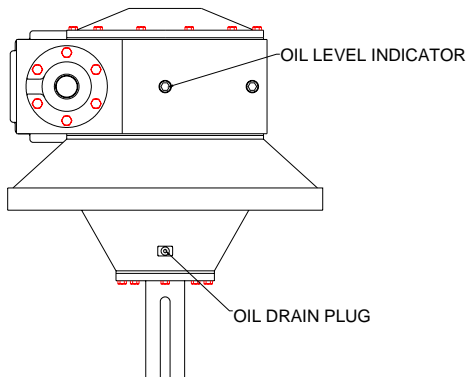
OIL DRAIN AND FILL INDICATOR
